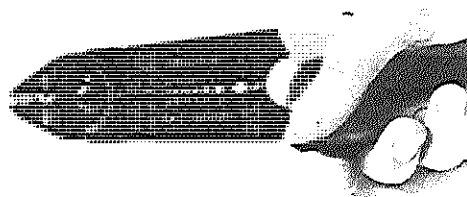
Closeup of superior indenter-type crimping tool used in Fig. 28. (Burndy #Y10M, \$6.95 at most electric supply houses). Grind away upper jaw to indenter, as shown, to admit Flag Lugs too.
